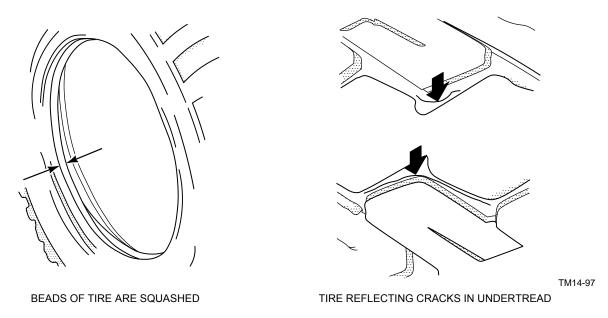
Example of Compressed Beads and Cracks in Rib Groove
